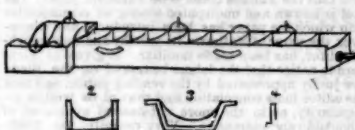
is a view of one-half of a moulding-box for pipes, the other half being an exact counterpart. Fig. 2 is a cross section, showing parallel sides. Fig. 3 is a similar section of a wedged-shaped box for heavier castings. It is formed with flanges along the sides, which meet those of the other box. By means of these flanges the two halves are bound together by glands. Fig. 4 is a cross section of a flanged rib. A pair of swivels is attached to the ends of each box, by which they are raised and inverted as occasion requires. Another pair is usually fixed on the middle of the sides, upon which, when the boxes are hung, they may turn in a direction perpendicular to the preceding, that they may set vertically at their destined position, which is commonly in a pit dug to receive them.
